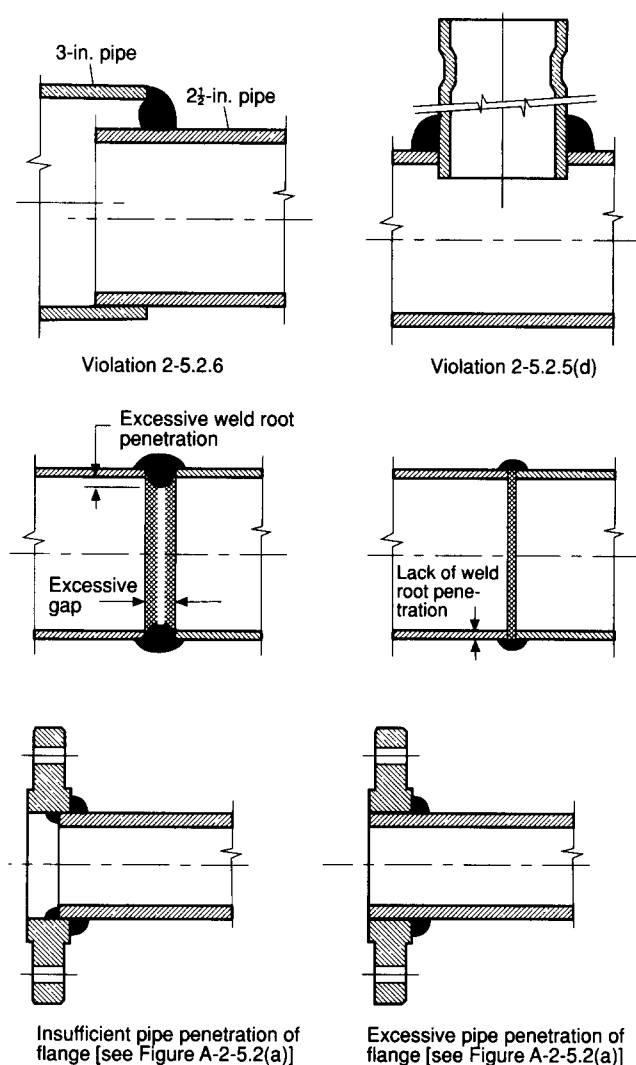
(b) Unacceptable weld joints.
